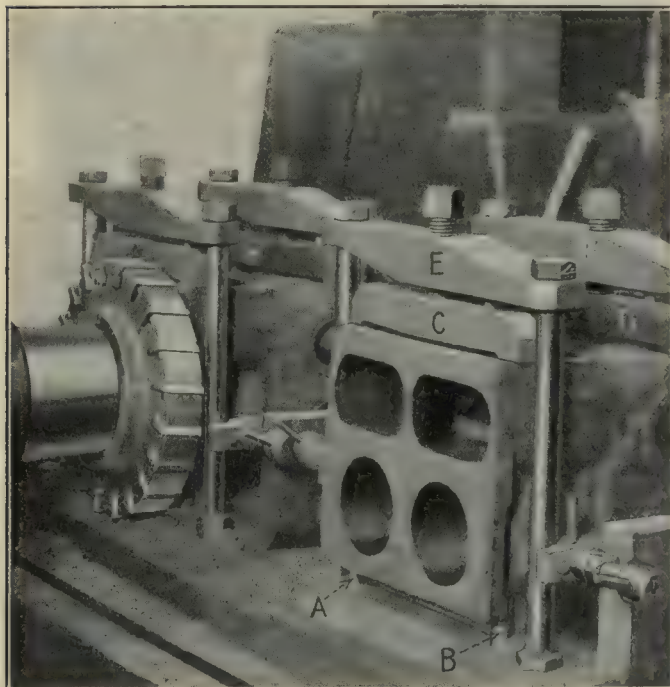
FIXTURES FOR MILLING CYLINDER BASE
